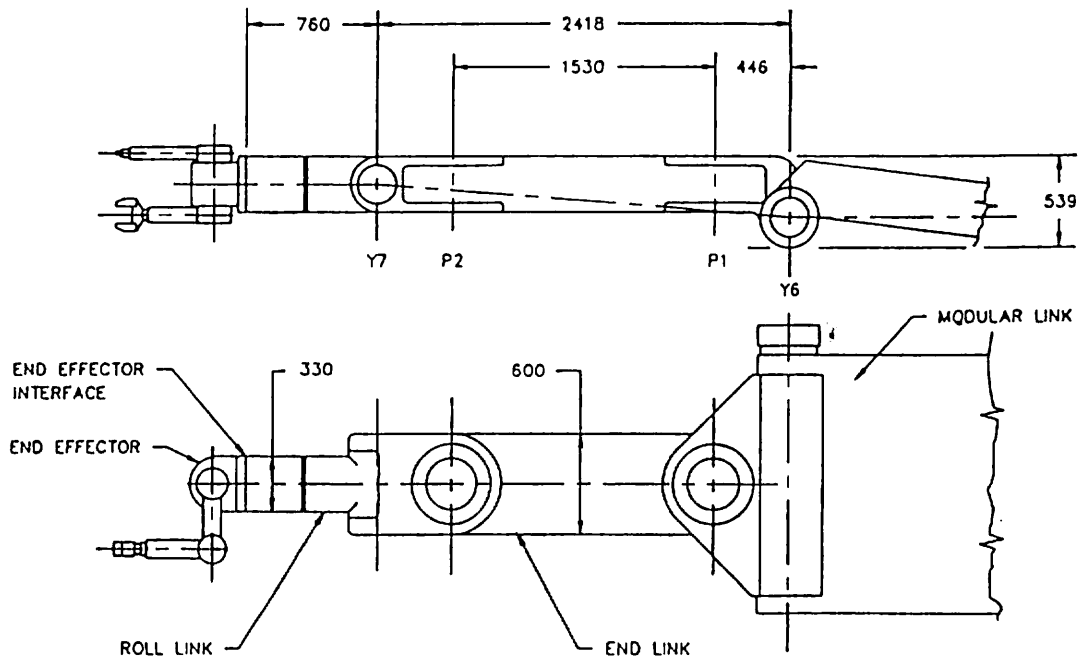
NET MANIPULATOR END LINK & ROLL UNIT
